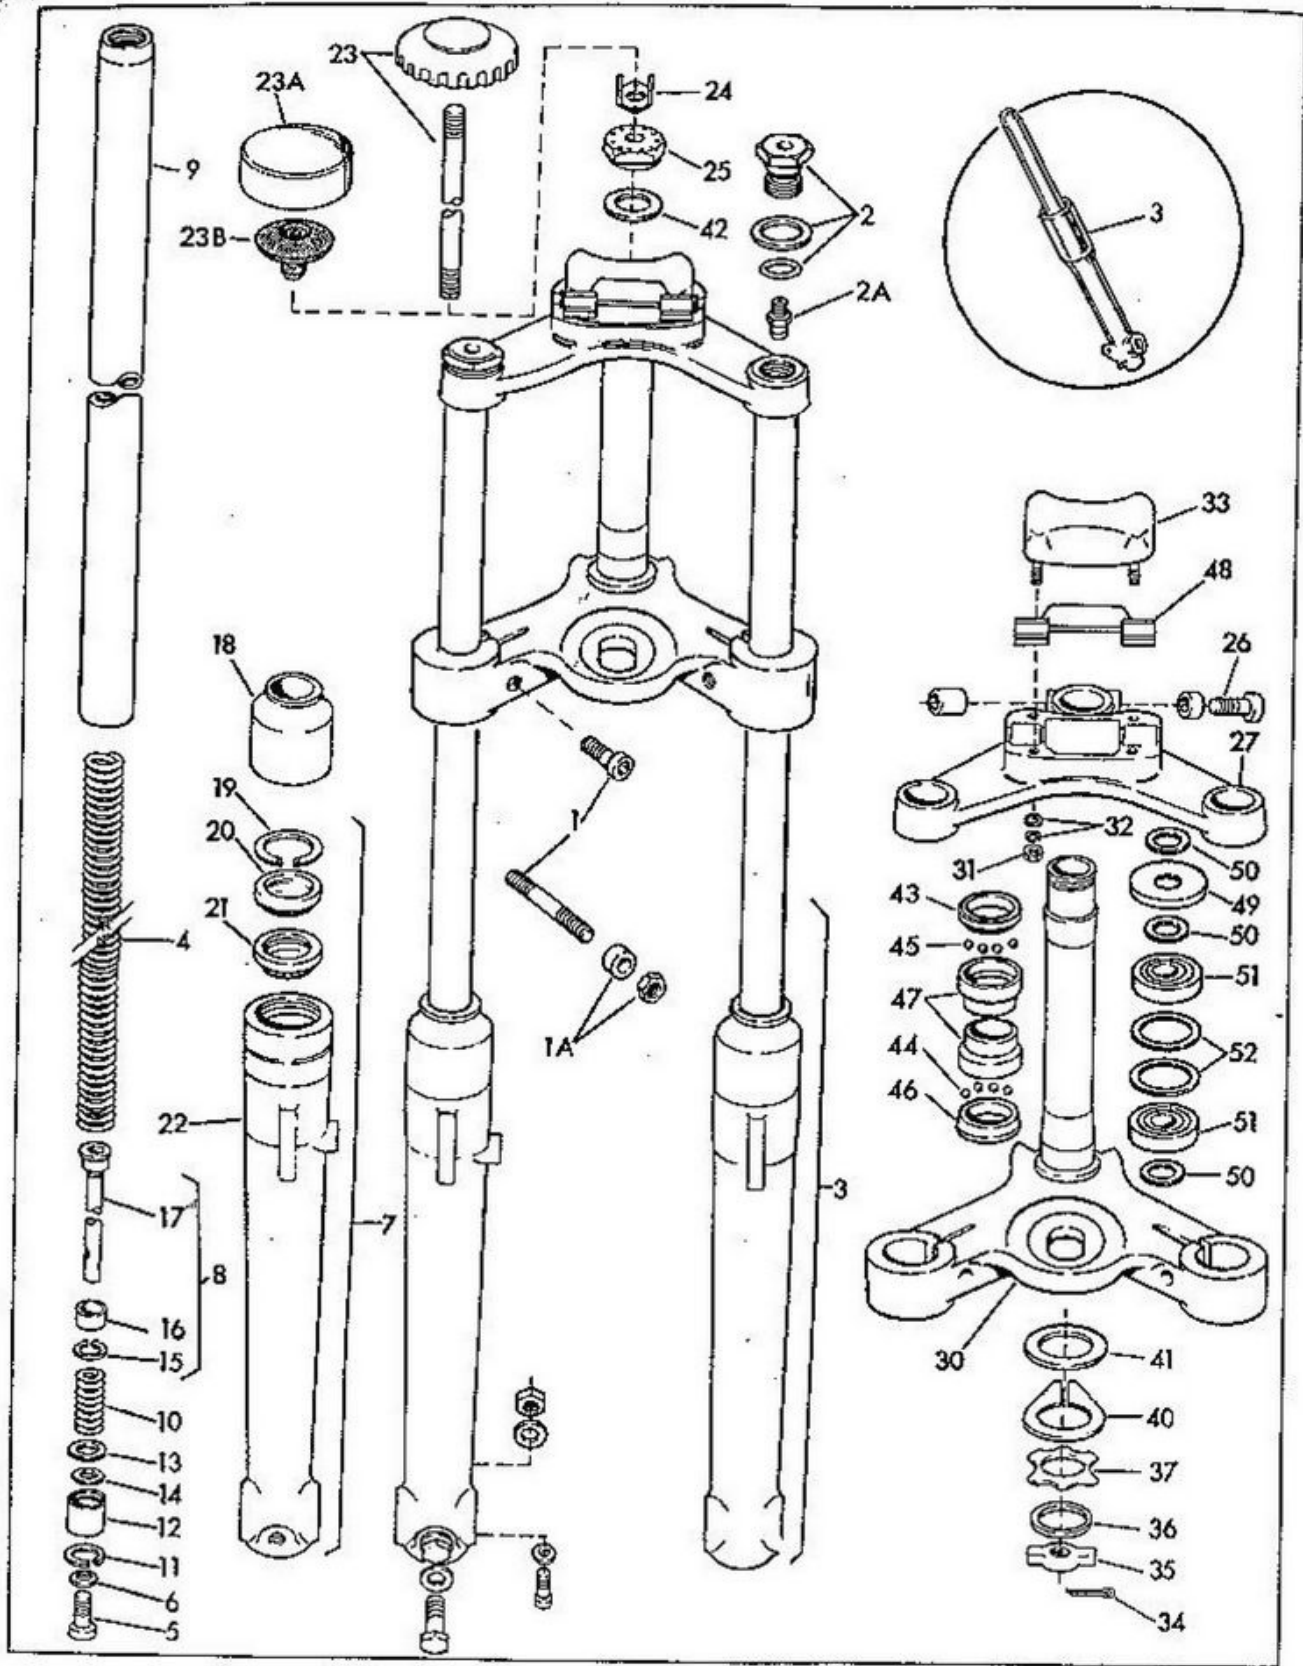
F-54A. Front Fork (1971 and Later) - Exploded View
